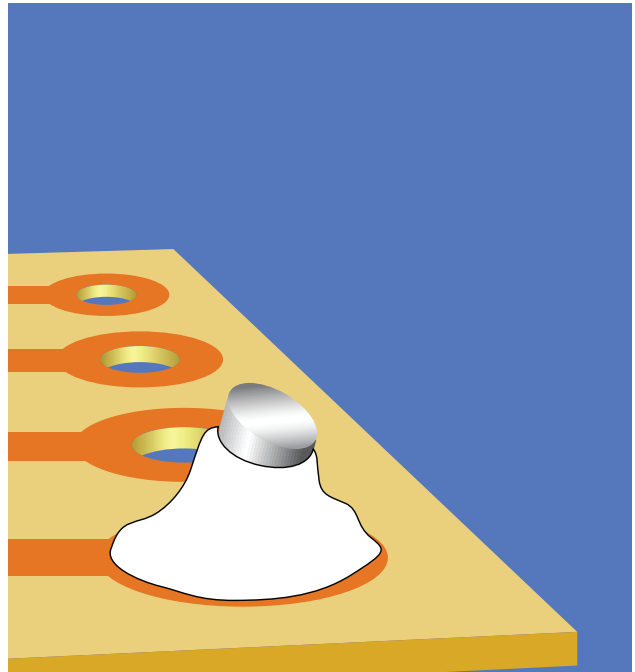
After the solder has cooled and hardened, you snip off the projecting wire.
